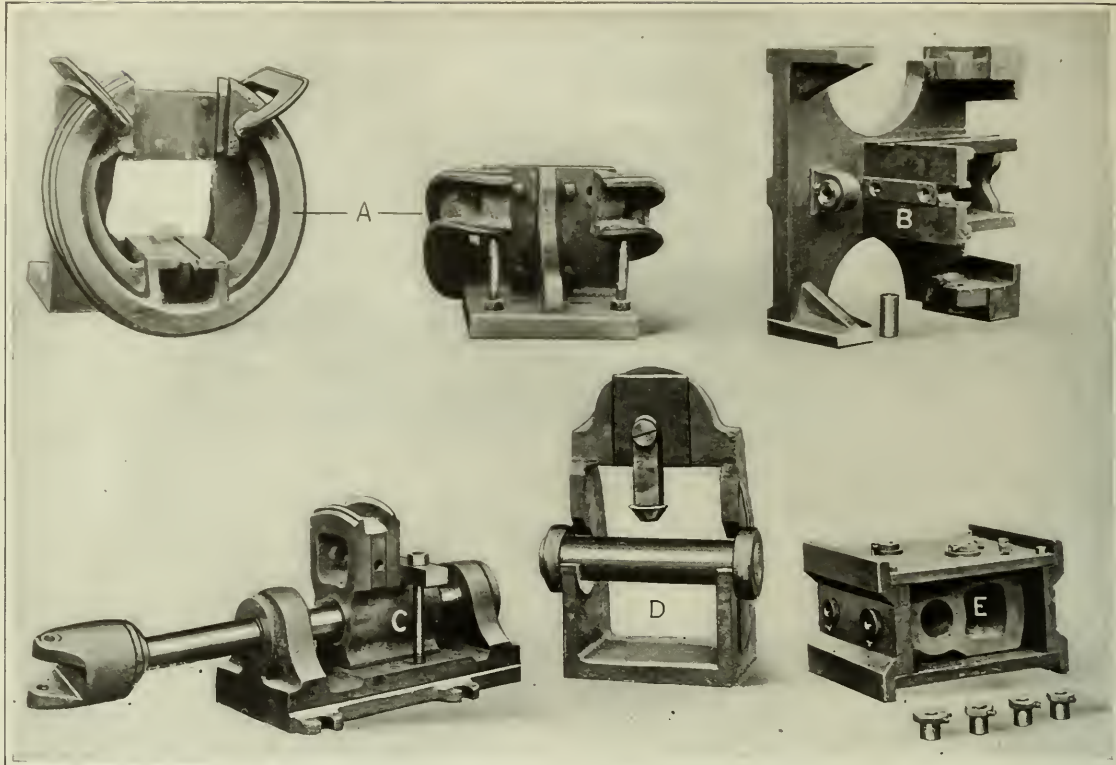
A, Shaper Fixture for Lead Cams; B, Drill Jig for Lead Cams; C, Boring Fixture for Lead Cam Hubs; D, Die Cam Testing Fixture; E, Drill Jig for Lead Cam Hubs
